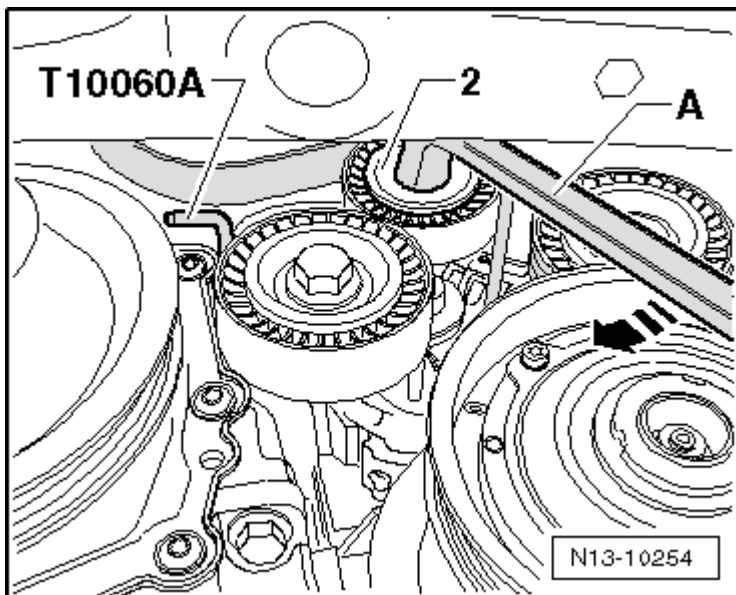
Swiveling Tensioning Element Using Open End Wrench And Securing Using Locking Pin T10060A
